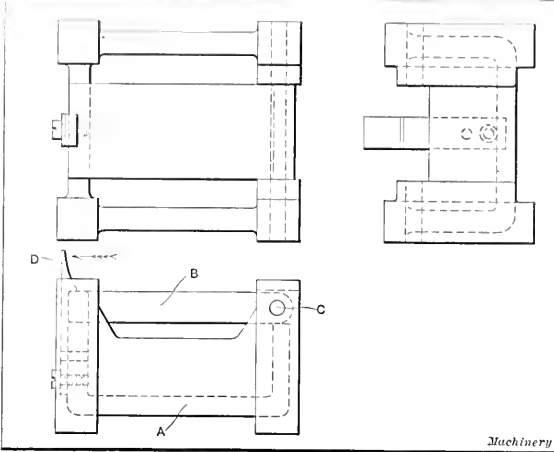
Type of Jig which has Cover held down by Spring Latch
